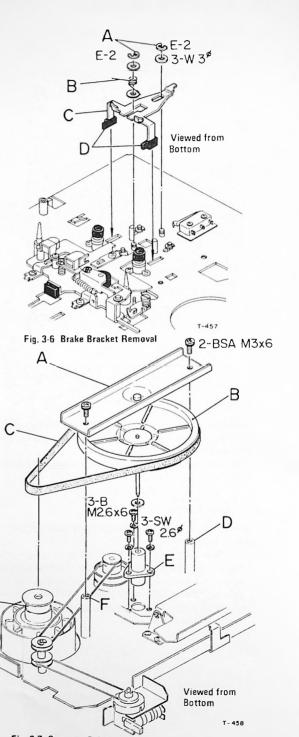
Capastan Drive Ass'y/Drive Belt Replacements
